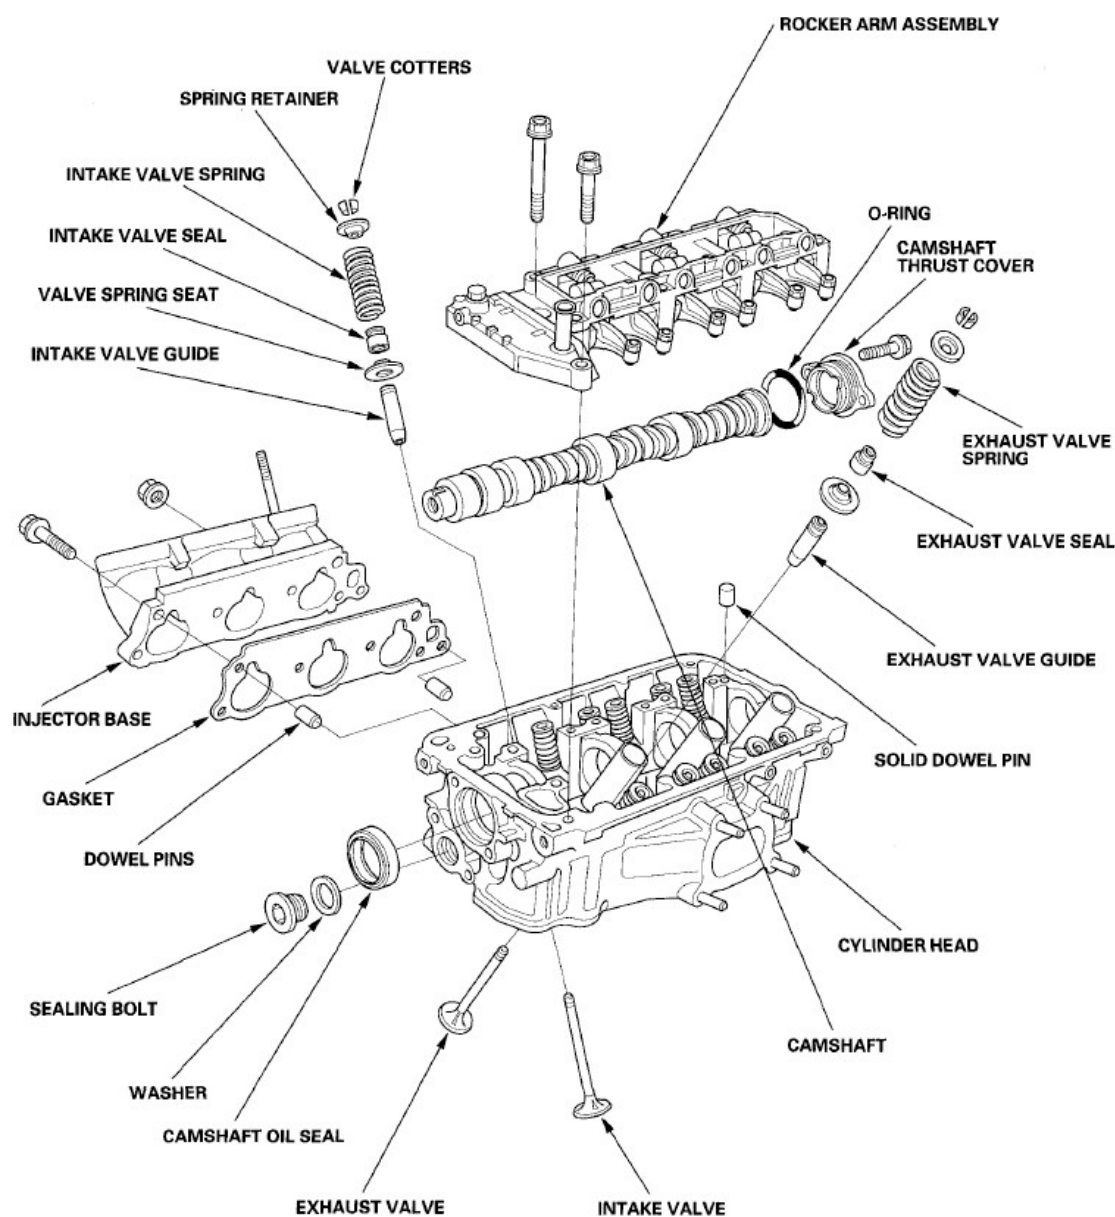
Identifying Cylinder Head Replacement Components (1 Of 2)
